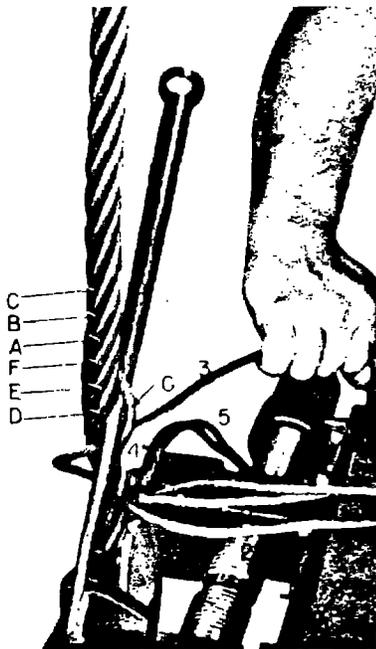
Passing Strand 3 Through the Hole Created by the Marline Spike.
